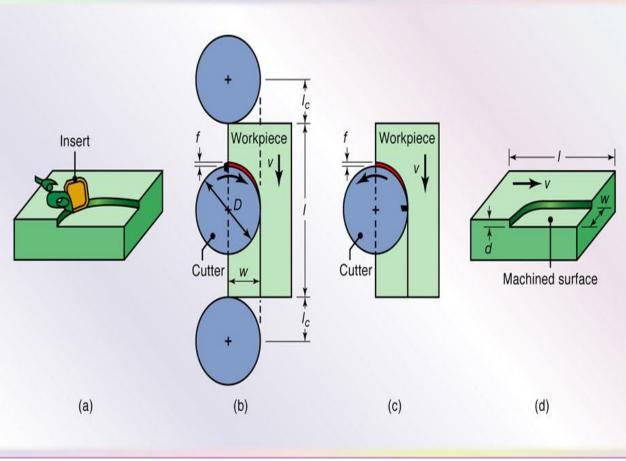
Face-milling operation showing (a) action of an insert in face milling; (b) climb milling; (c) conventional milling; (d) dimensions in face milling. The width of cut, *w*, is not necessarily the same as the cutter radius.
